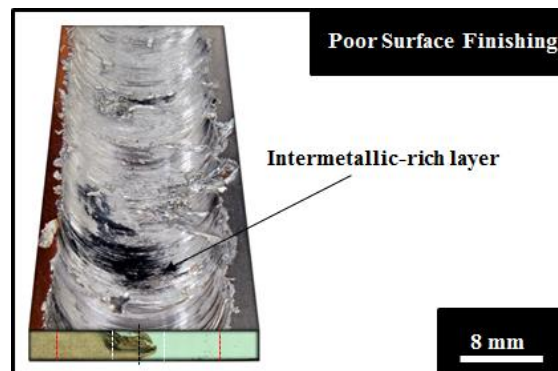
Poor surface finishing in AA 6082/copper friction stir butt welding (adapted from Galvão et al., 2012c).
